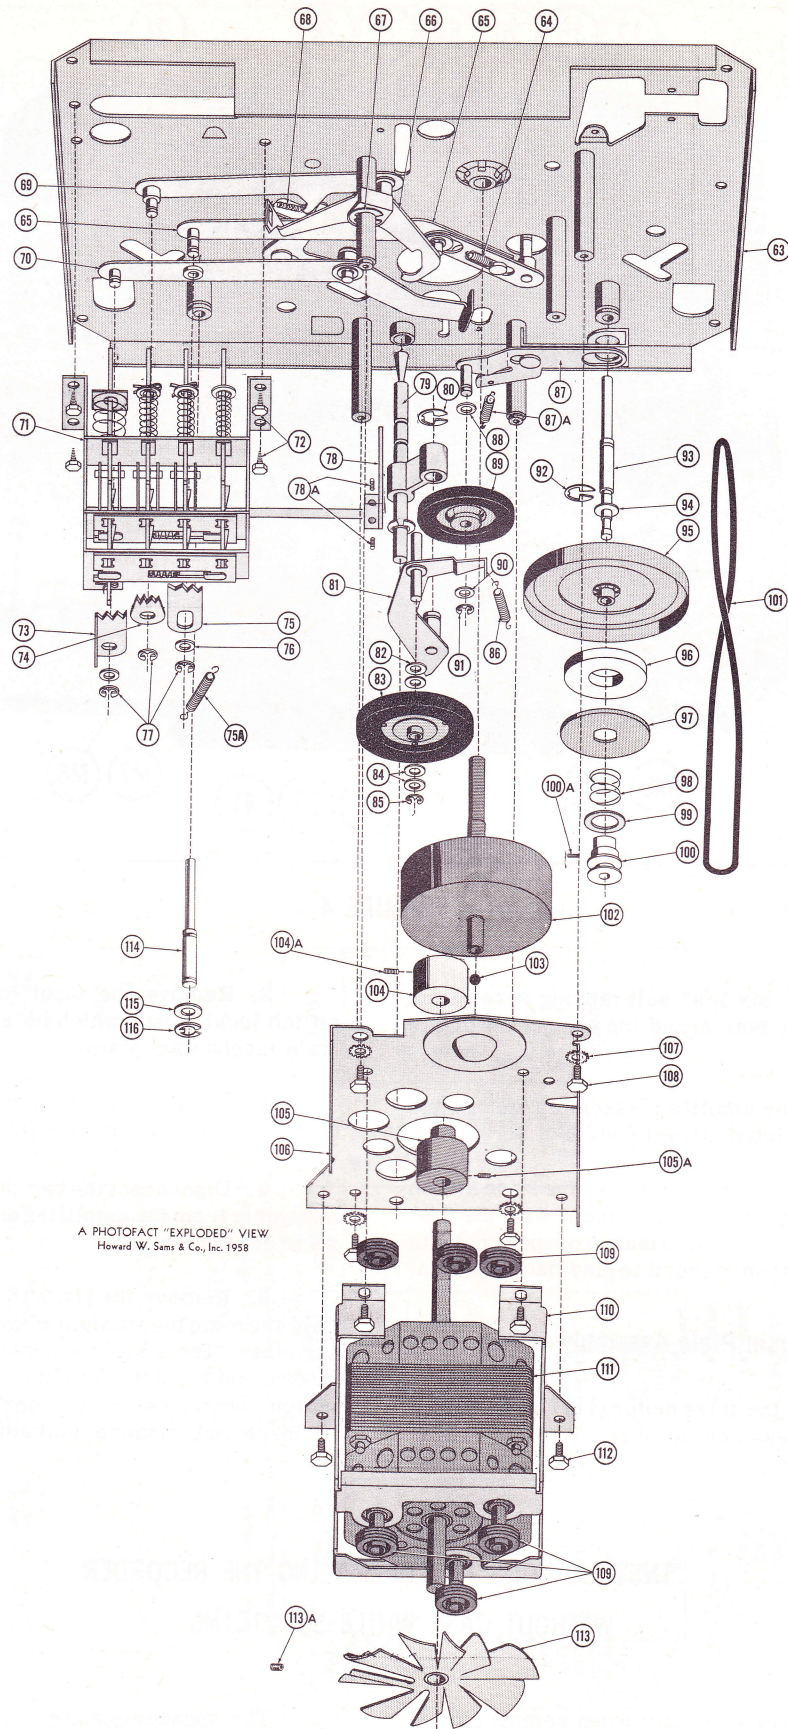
A. EXPLODED VIEW OF PARTS ABOVE MECHANISM PLATE.
